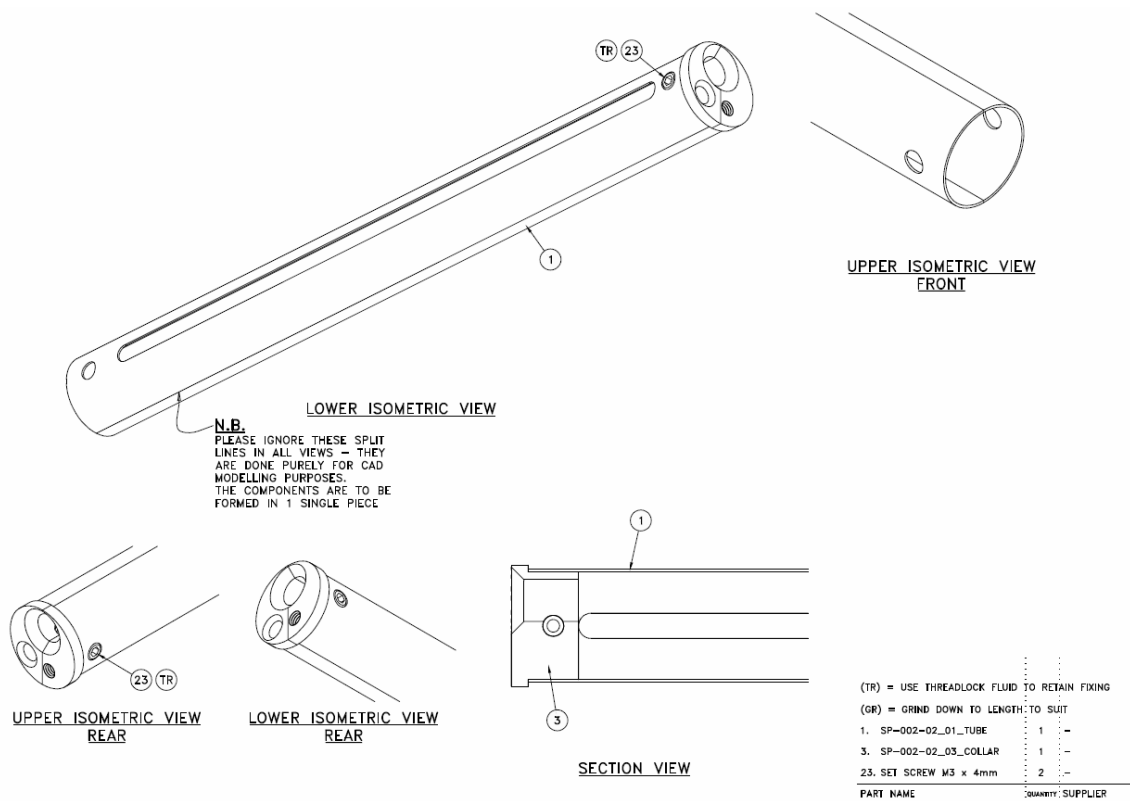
Detail drawings of the piston part of the actuator with all parts that attached to it, which is connecting the piston to the barrel.
